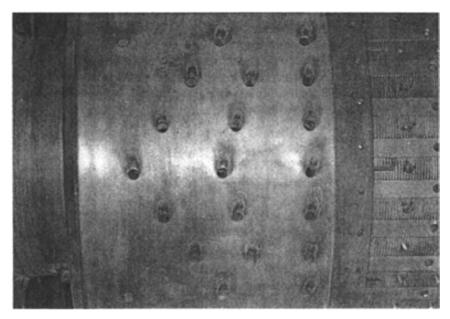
[R02] The retaining ring of a 2-pole turbine generator with vent holes.
